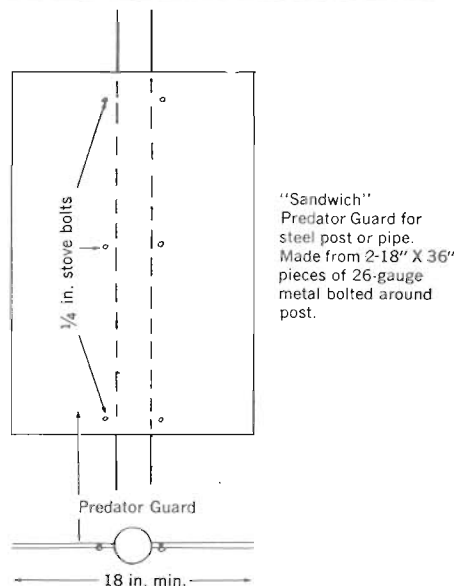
Construction and mounting details for flat predator guard used on posts and pipes.
